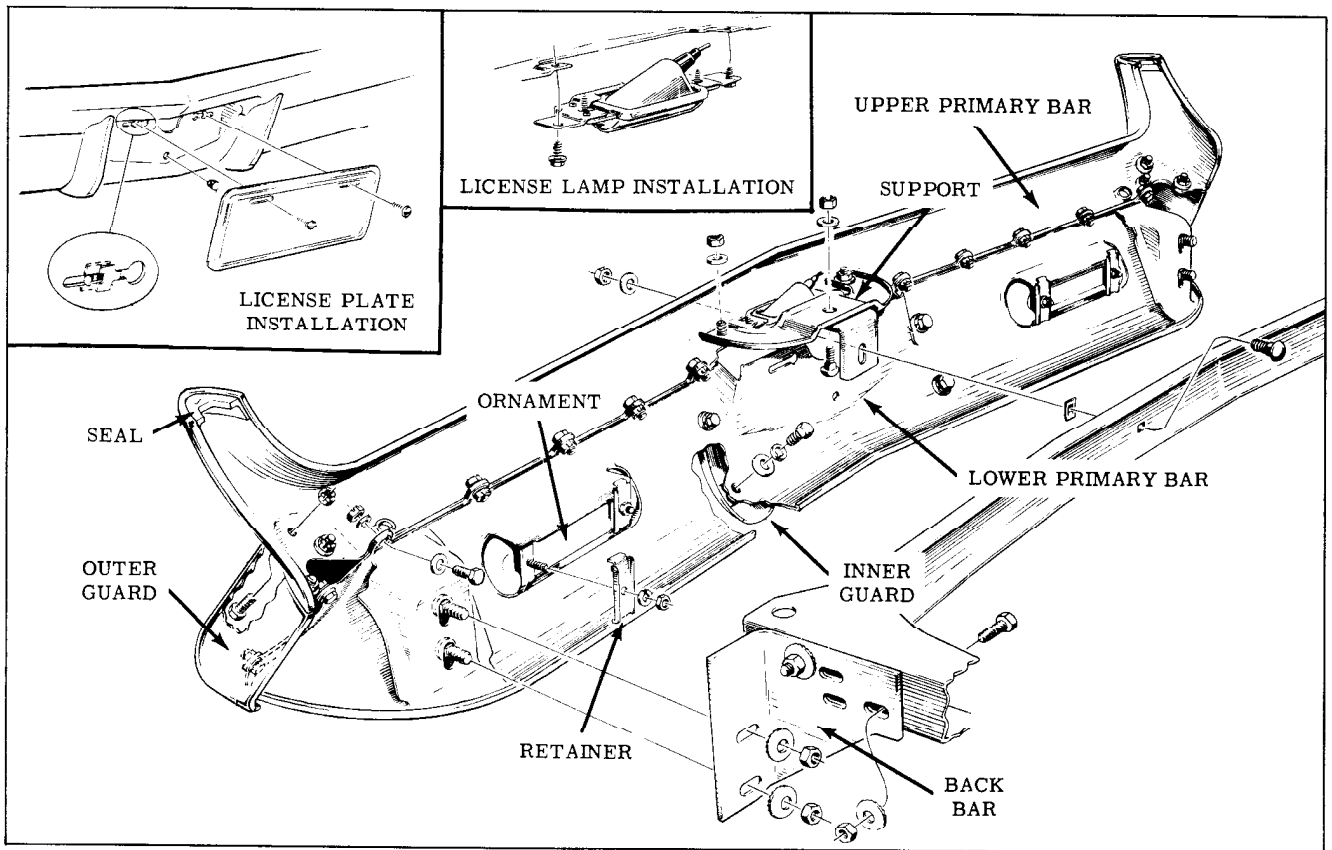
Rear Bumper Assembly (All Except Fiesta)
